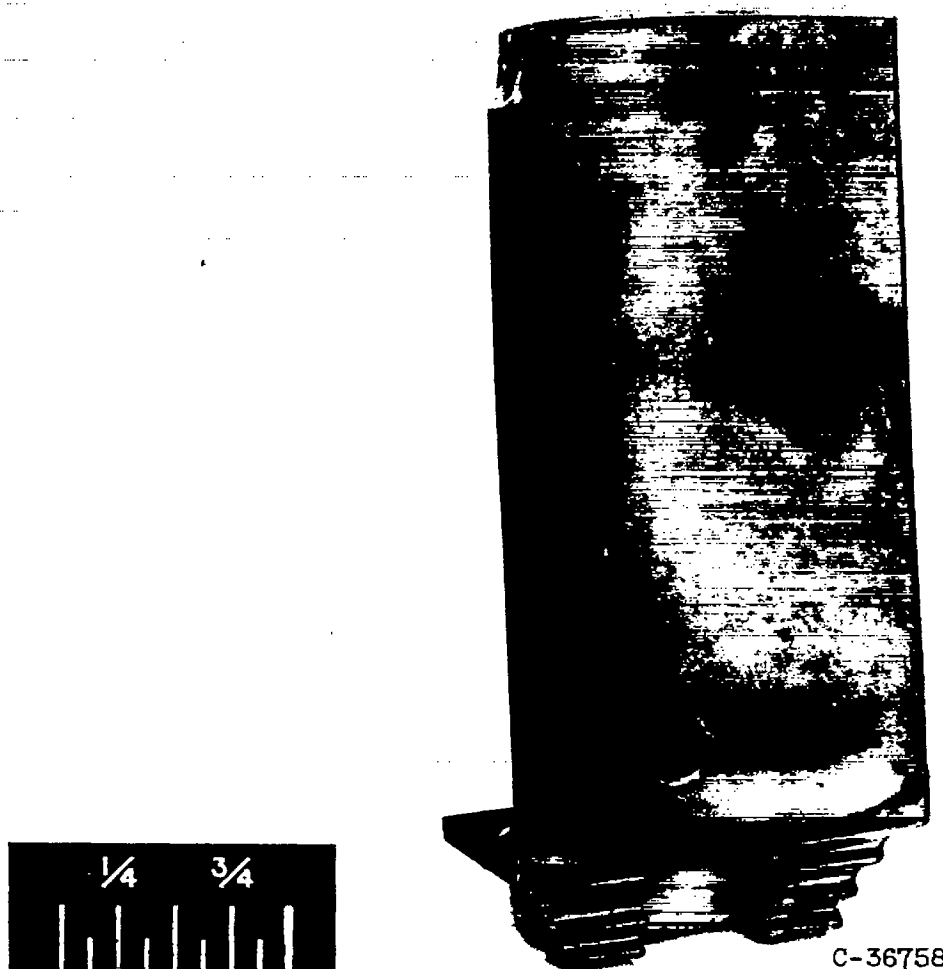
Fatigue failure in the tip of a Group 17 hollow X-40 cast blade that had been heat treated and shot-peened in the root section.
